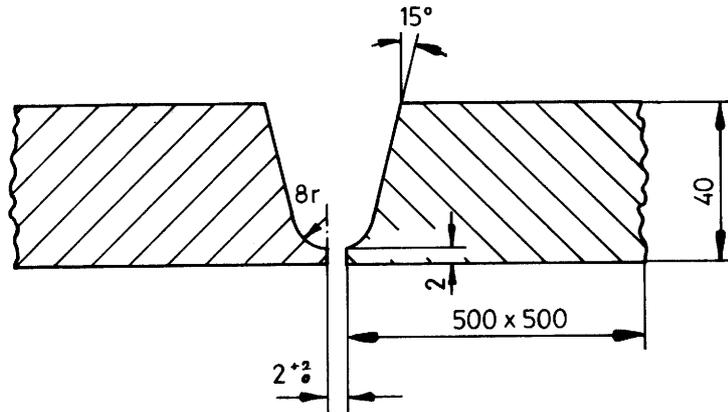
Weld site preparation cast steel and nodular iron
